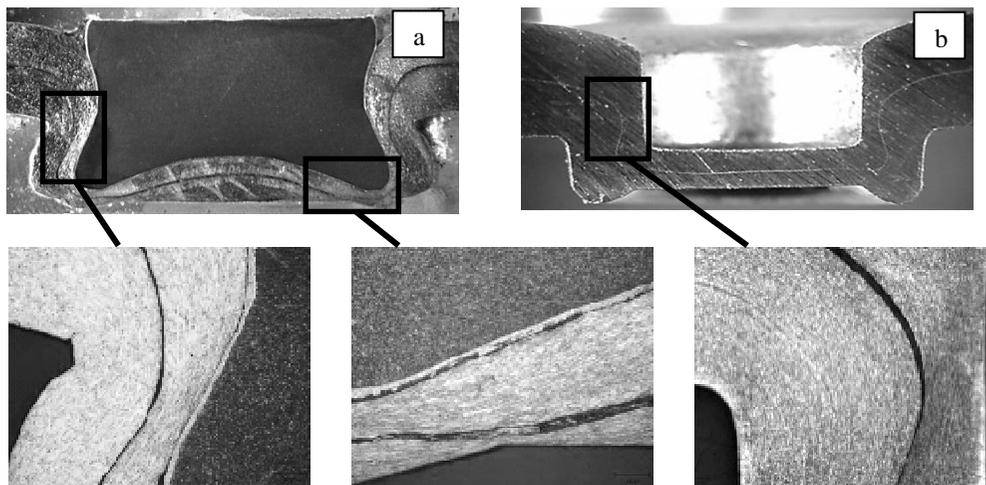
Critical areas of the joints: a) self-piercing riveting joints; b) clinching
